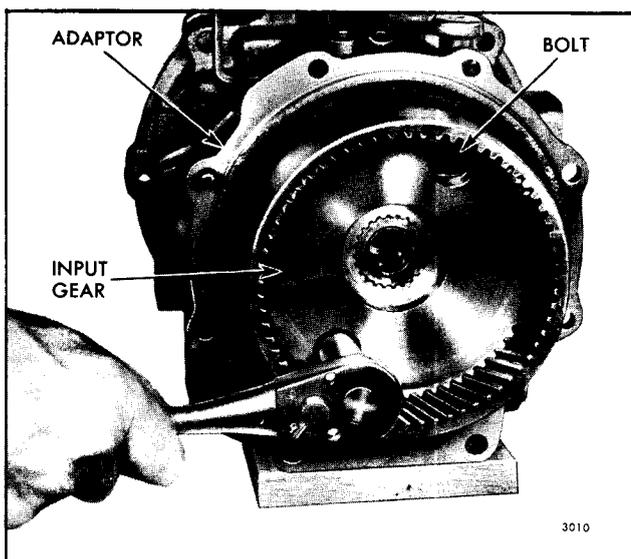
Removing Reduction Gear Adaptor to Reverse Gear Housing Bolts (1.5:1 Ratio)
